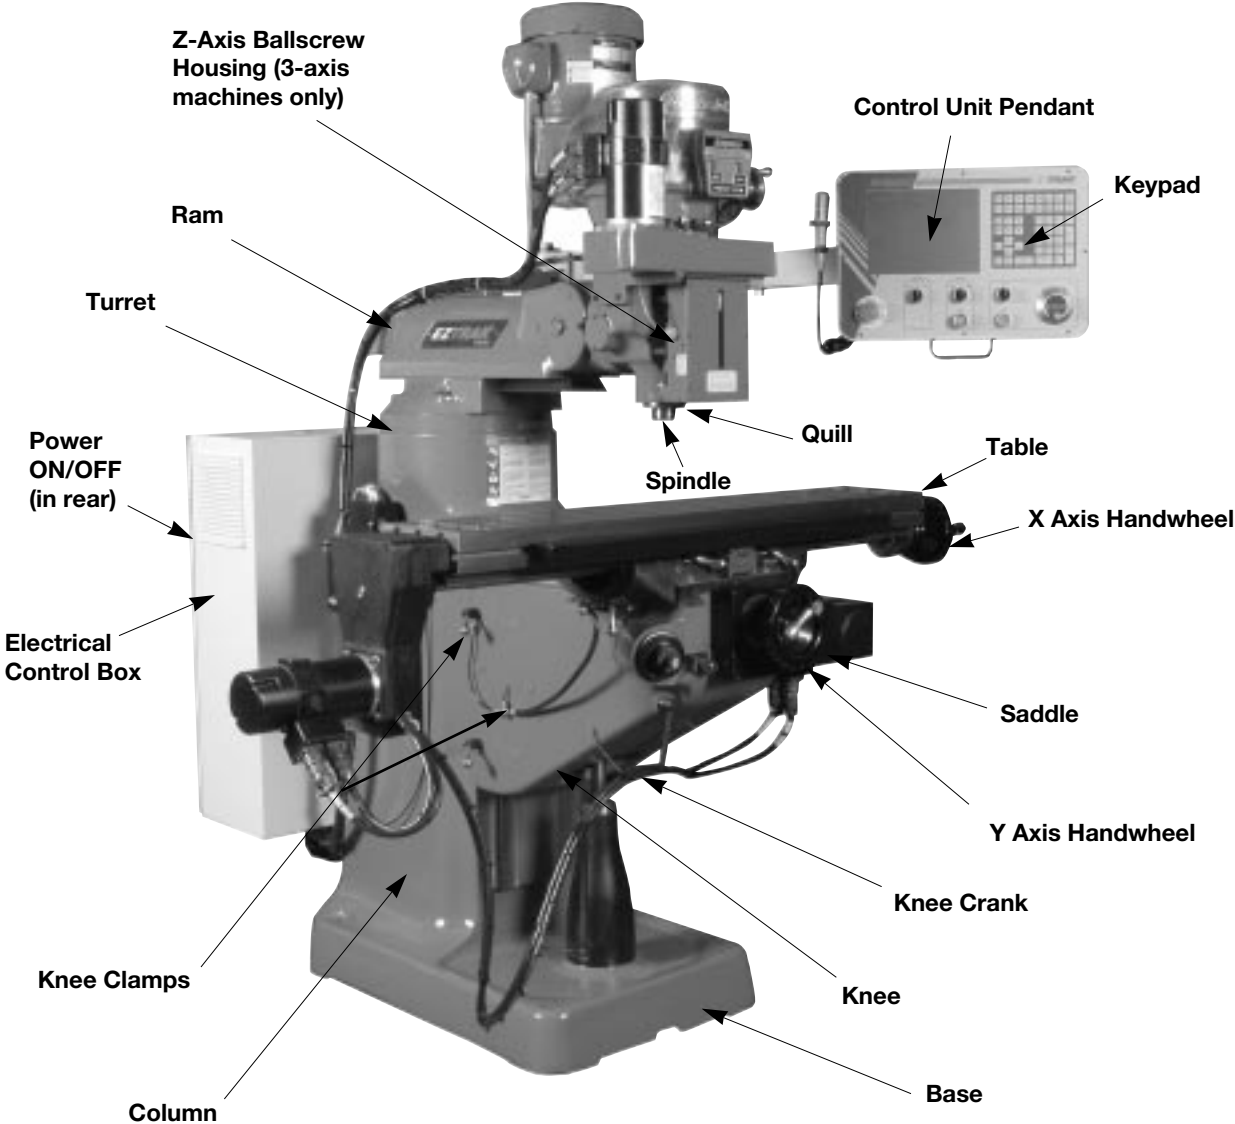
EZTRAK 3-Axis Milling Machine major components
